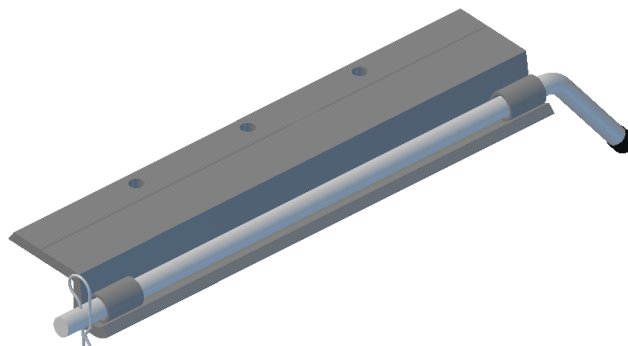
Illustrated view of 36"-long Trailer Receiver with installed 7/8"-dia. aluminum Retaining Rod
